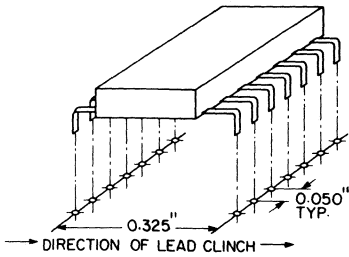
Surface interconnection method (reflow soldering) for RCA flat packs.
